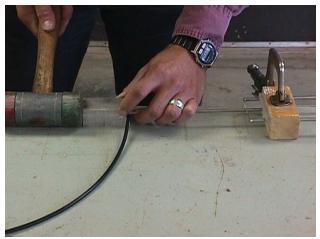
Pressing the center rod (with cable already soldered to it) through the center hole of the acrylic piece.
